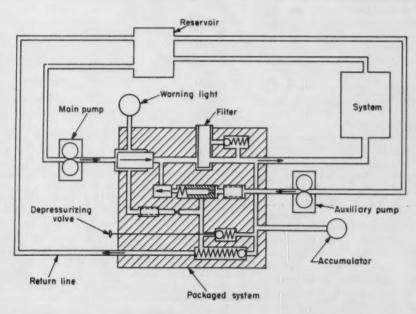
Packaged hydraulic subsystem for B-52 jet bomber. Assembly incorporates all basic safety and protective components for a single mainpump system. Package is 50 lb lighter than nonpackaged components performing same service.
